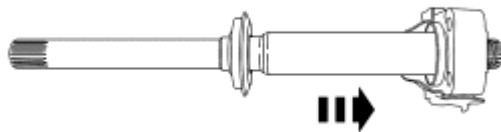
Removing Intermediate Shaft While Supporting Both Ends Of Intermediate Shaft
